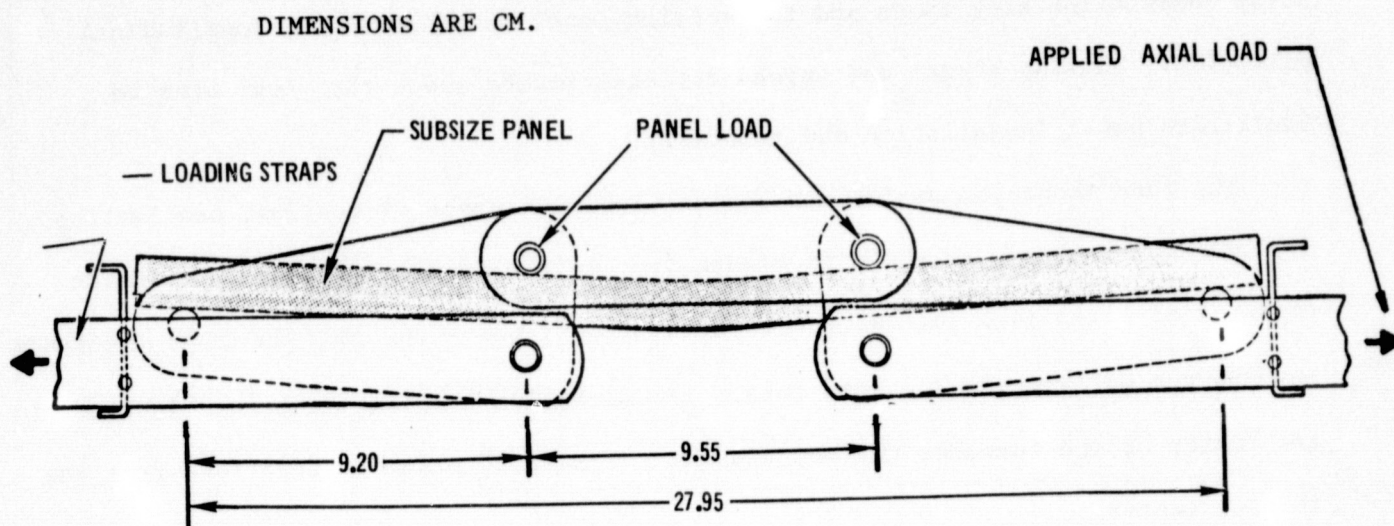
(a) MECHANISM CONVERTS AXIAL LOAD TO PANEL BENDING LOAD
